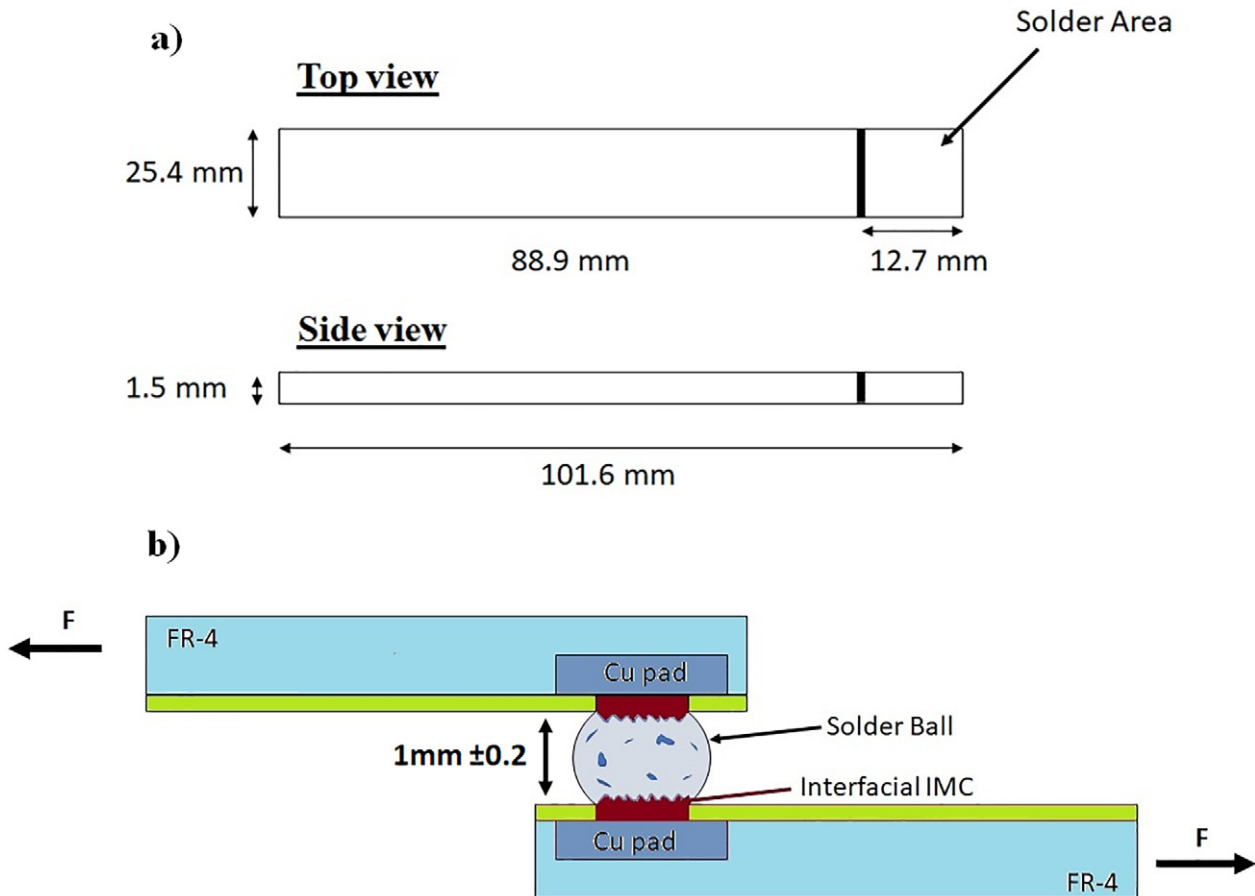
(a) Specifications of the shear test specimen and (b) Schematic drawing of the solder joints shear test.
